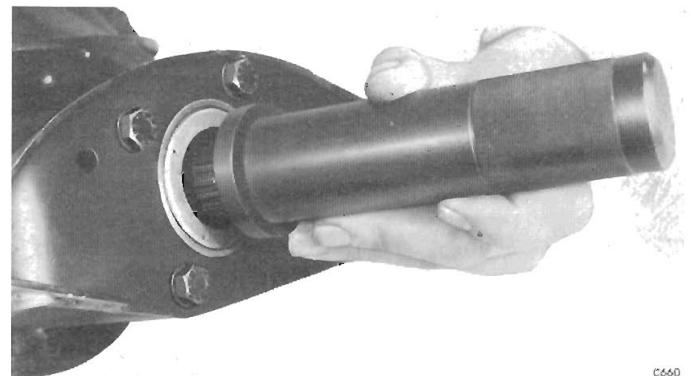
Pressing the inner axle shaft through the bearing and housing
